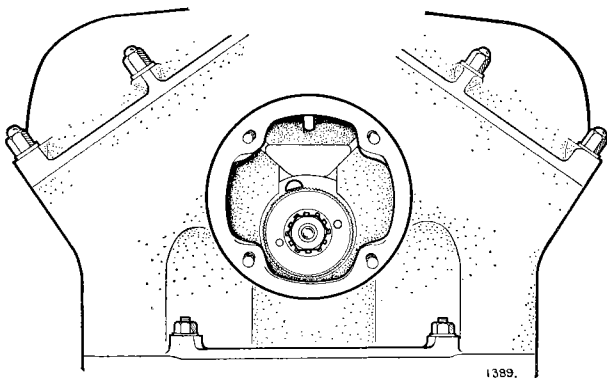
Showing the serrated plate for adjustment of the top timing chain tension
